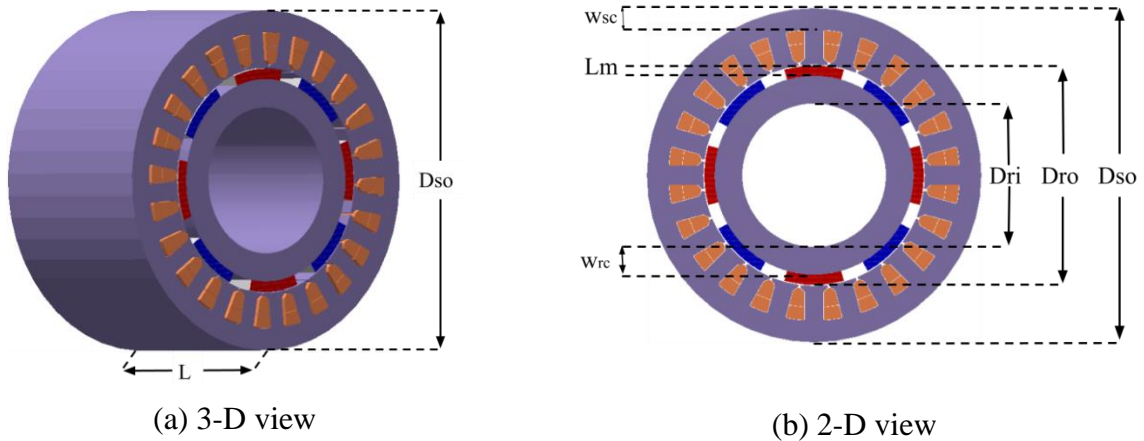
2-D and 3-D constructional view of SPM-RFBLDC motor.
